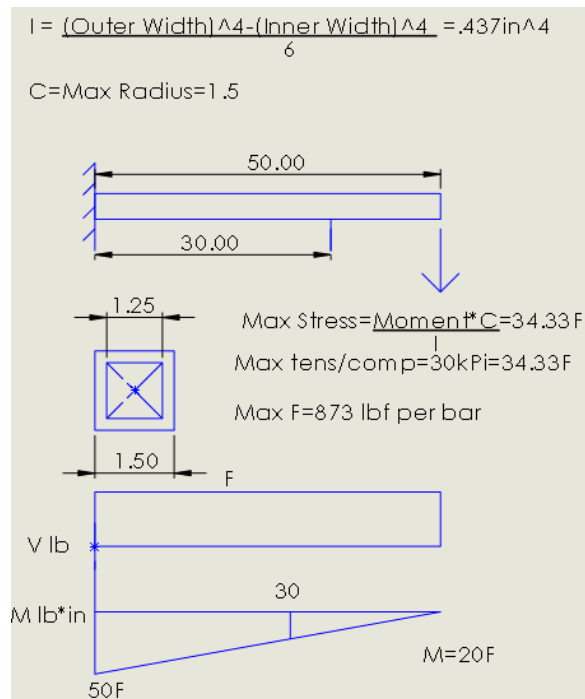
CANTILEVER BEAM MODELING FORCES ON HANDLE
